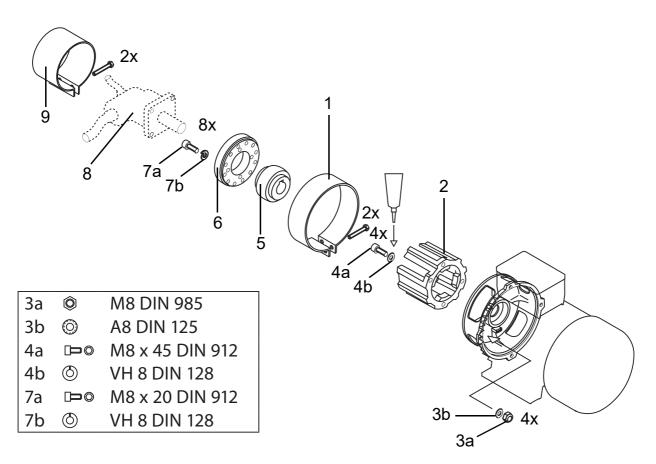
Assembly of flange mount for hydraulic drive (dual-bearing, BG 132 model with standard bearing plate)
